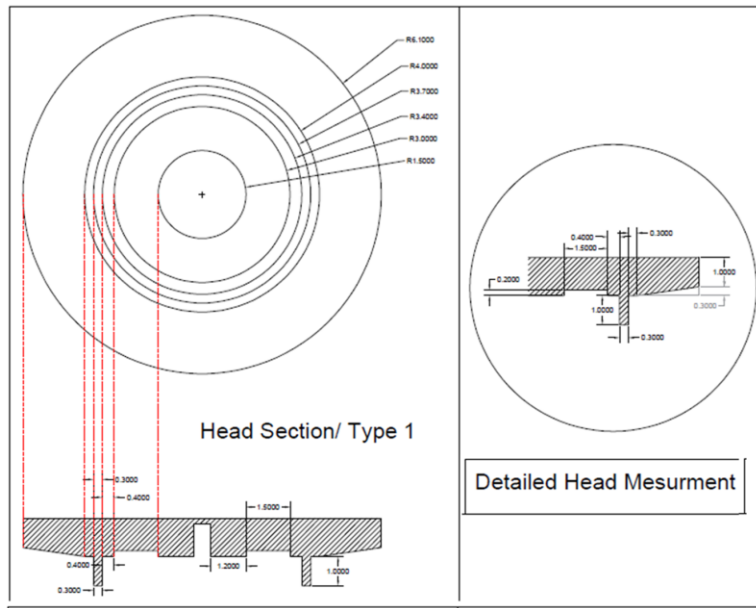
2D CAD drawings for fabrication of the transducer head.
